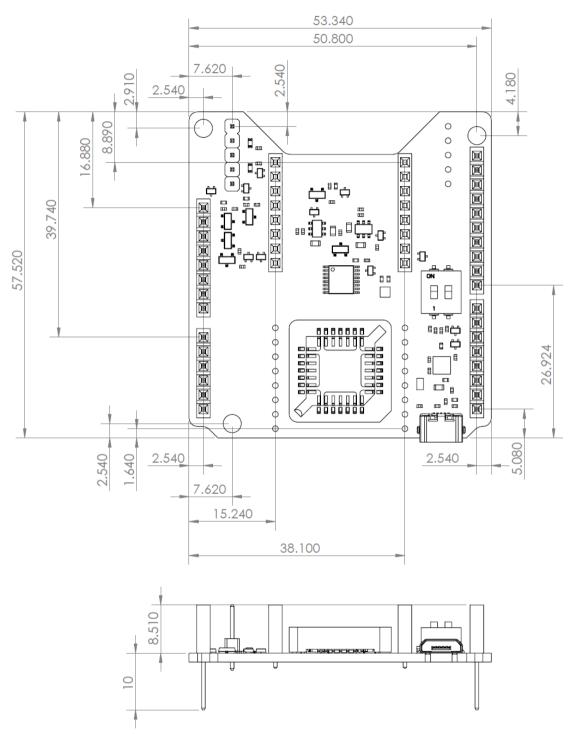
MTi 1-series Shield Board package drawing (Top and Side view)
